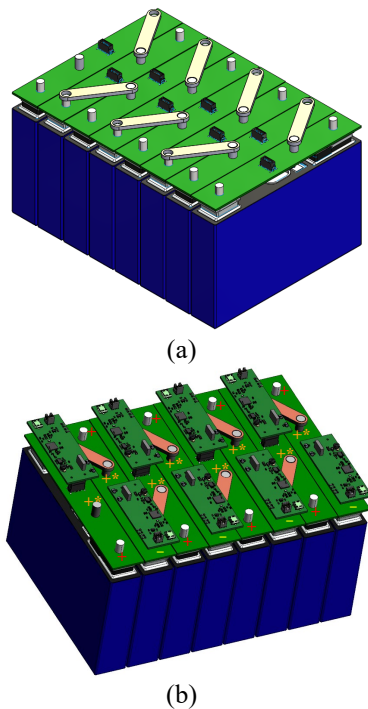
(a) Series connection of the 8 smart cells and (b) mounting of the control PCBs to complete the assembly of the smart battery pack.
